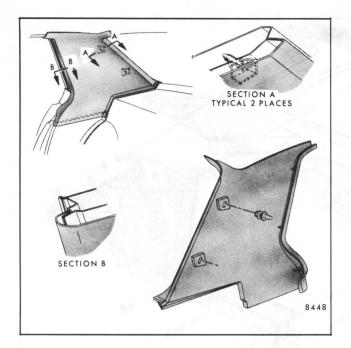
Quarter Upper Trim Attachment - "X-69" Style
